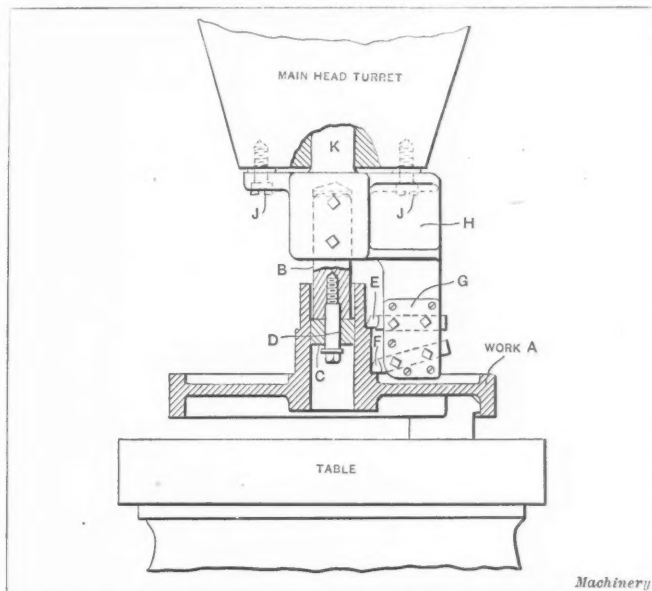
Multiple Turning Tool for Vertical Turret Lathe
